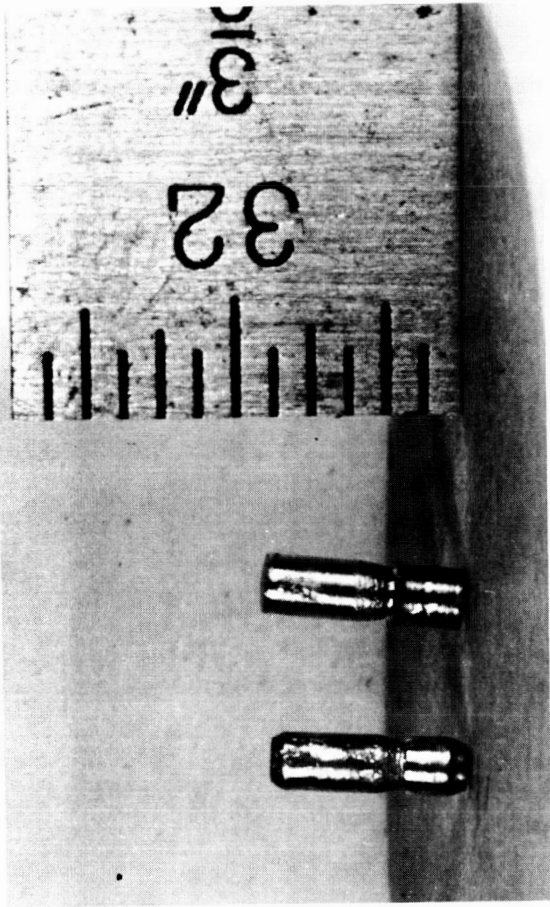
Pump end thrust bearing anti-rotation pins. Wear produced by action on end plate. Bottom part of pins were in the housing.
